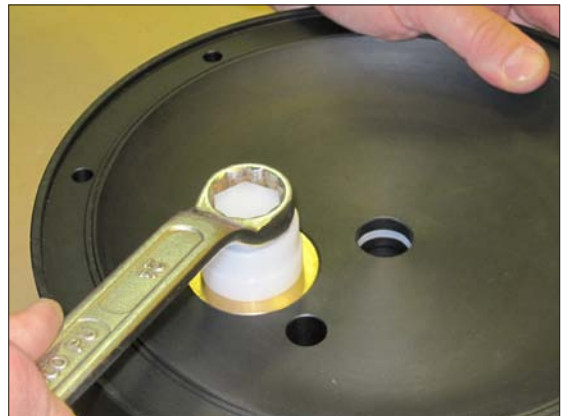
Tighten carefully by means of the mounting tool (pos 282) and a spanner.
